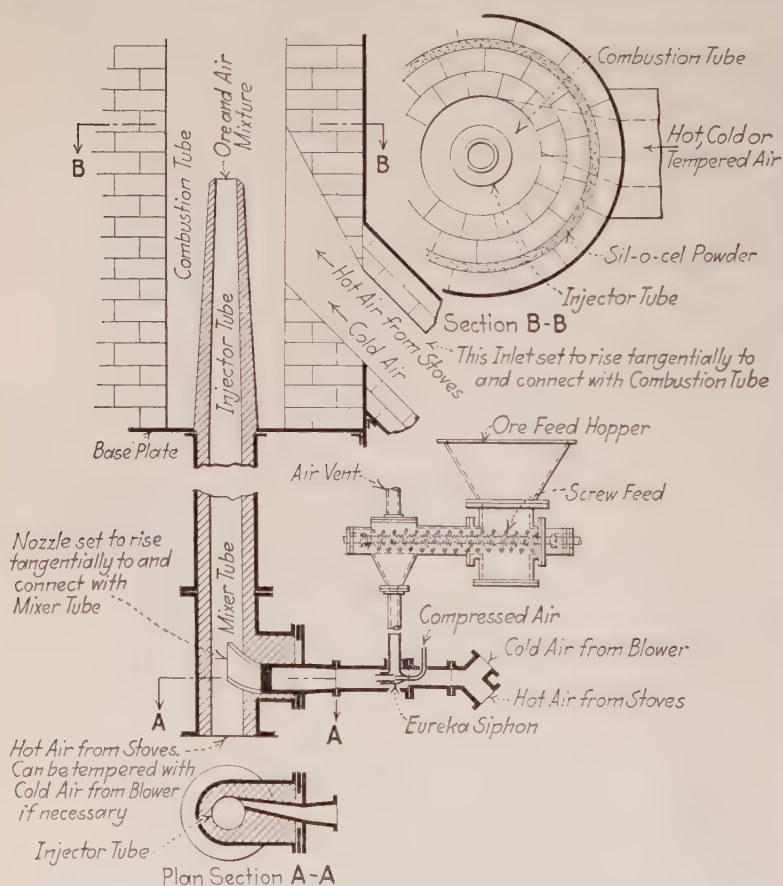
FEEDER AND ARRANGEMENT OF 12-TON FURNACE.
